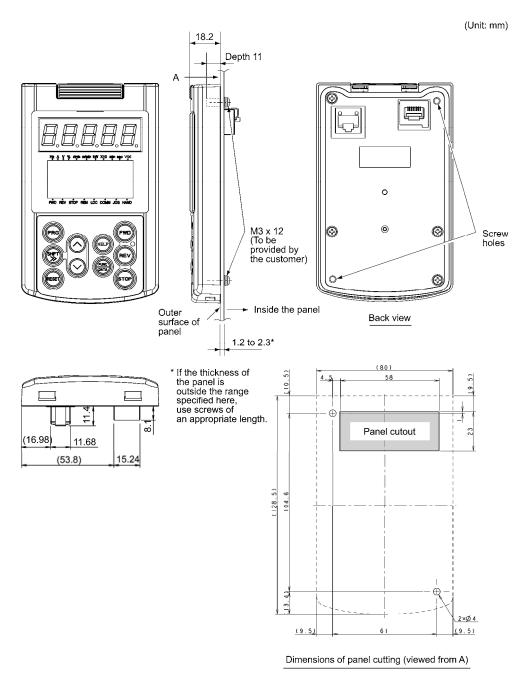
Location of Screw Holes and Dimension of Panel Cutout
